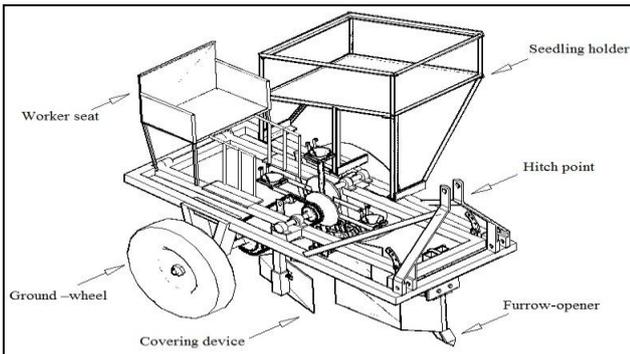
Isometric of the machine prototype developed for sugarcane transplanting.
